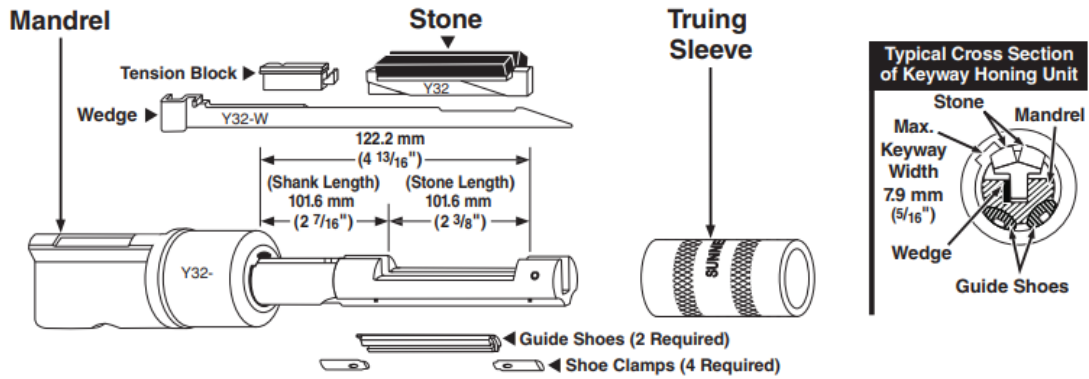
Exploded view of Sunnen honing mandrel [78]
